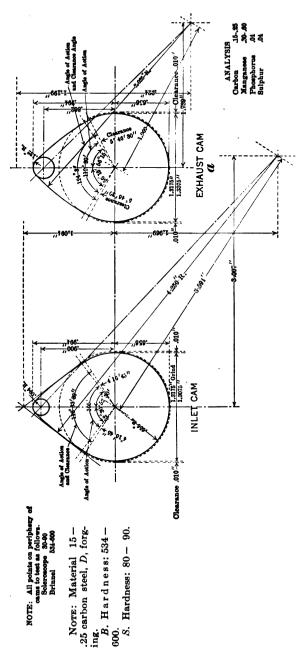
and 61c show the cam shaft details as required in working drawings. After the shaft is turned the cam surfaces are hardened and are then ground in a cam grinding machine. The necessity for having the cams hardened is obvious. Frequently the small gears driving the accessories, are also made integral with the shaft.
